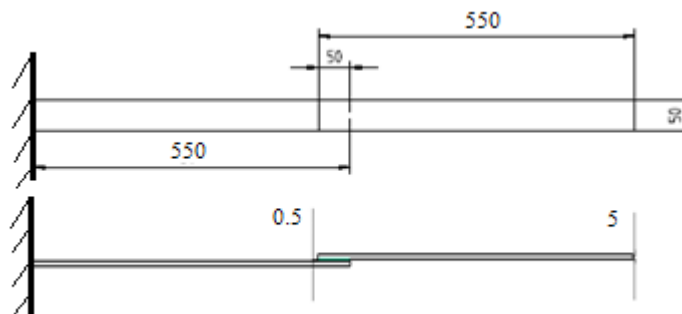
Single lap adhesive bonded joint (All dimensions in mm)
